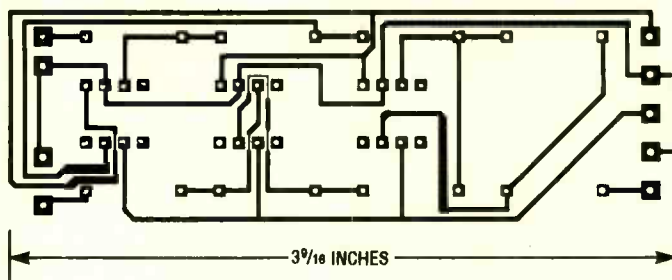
When preparing the printed-circuit board for the Subliminal Tape Mixer, remember that you'll need to duplicate the printed-circuit pattern shown here twice... either on two separate boards or on a single board as the author did.
